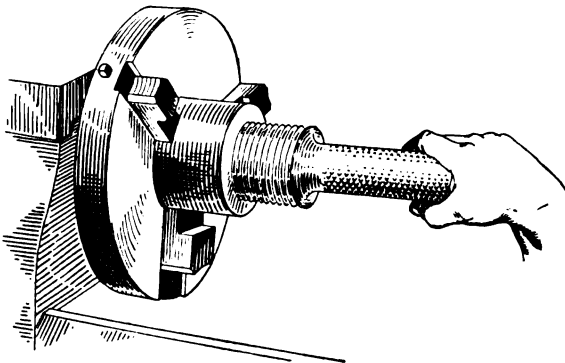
CRUDE AS IT IS, THE SCREW PLUG SEEMS TO HAVE A MONOPOLY ON THREADED HOLES
